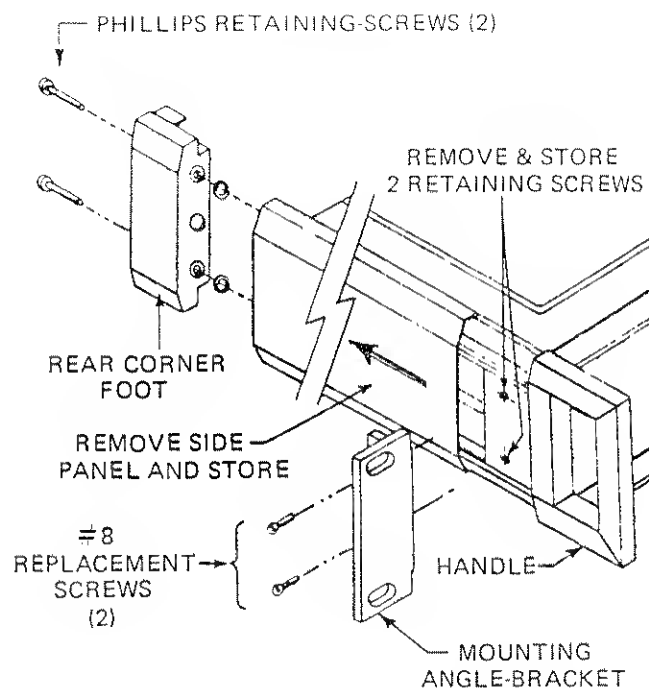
Fixed-Mount Angle-Bracket Detail
